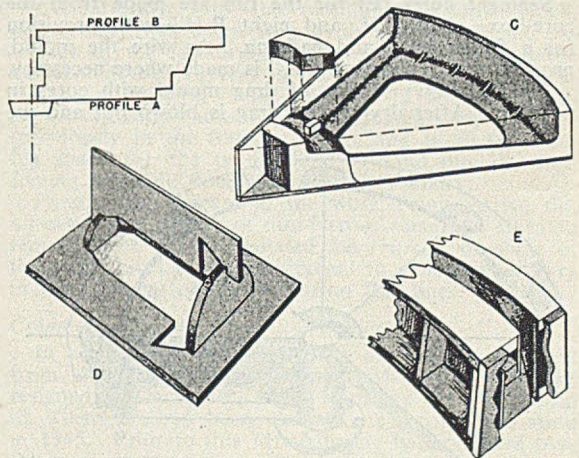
PATTERN TACKLE FOR THE CASTING OF THE SINGLE-ARM WHEEL IN STEEL.
